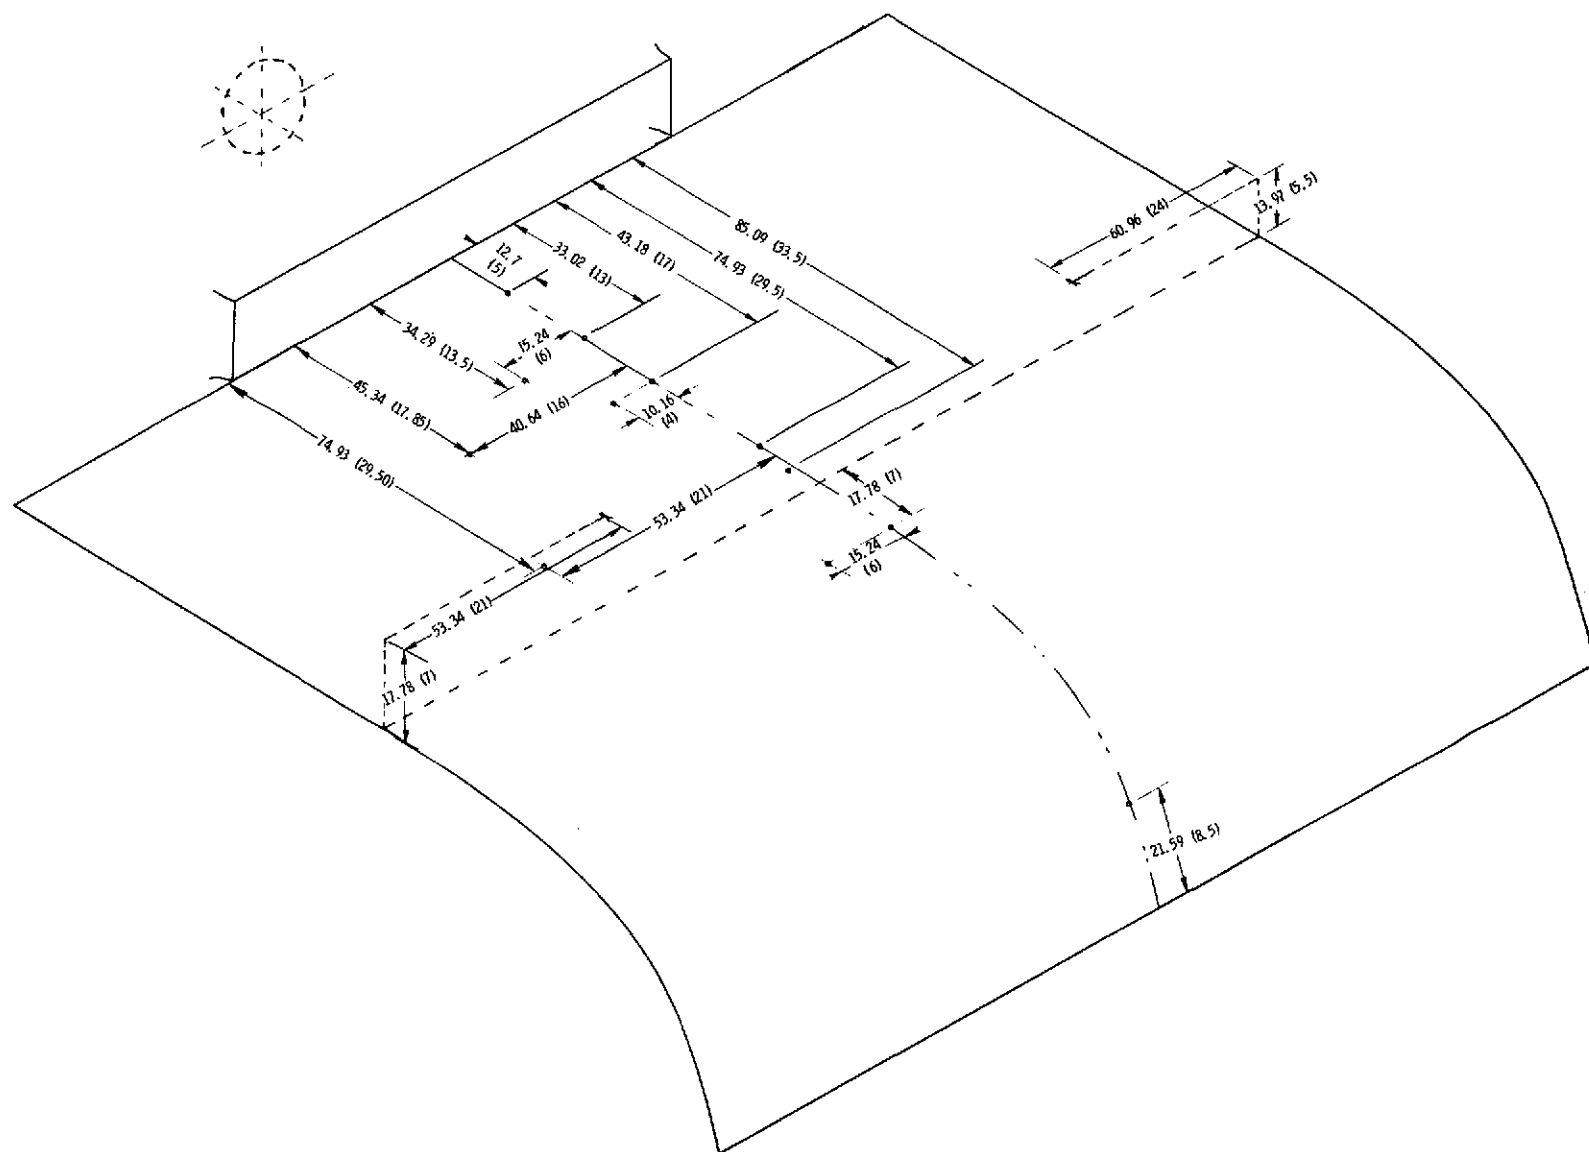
Thermocouple locations on wing and flap. $\delta_f = 70^\circ$. All dimensions are in centimeters (inches).
